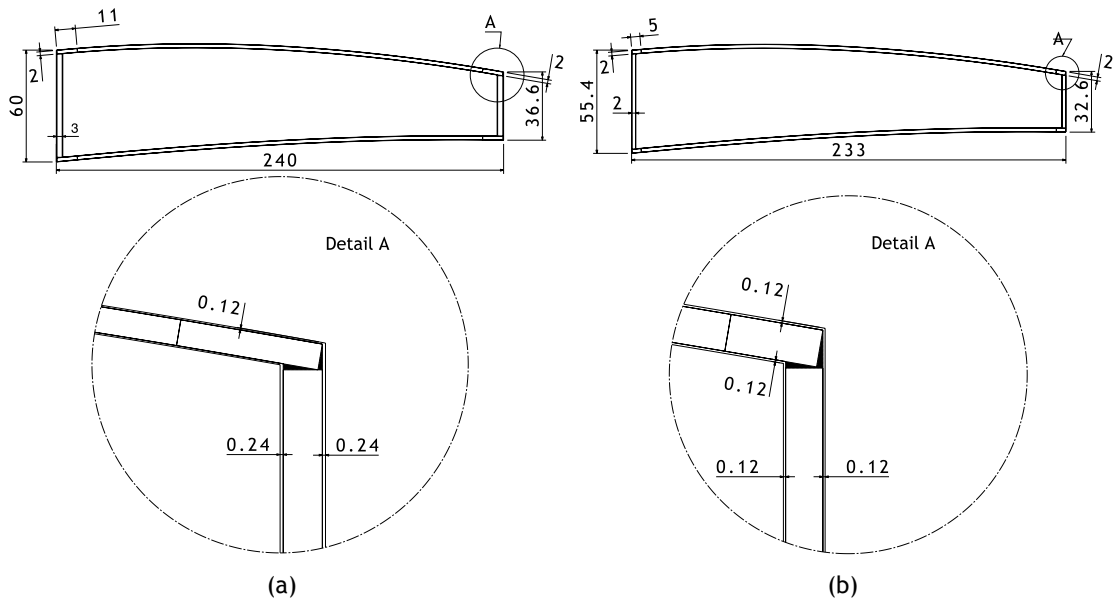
Wing-box cross-sections showing structural elements' dimensions (in mm): (a) IFW and (b) OMW.
